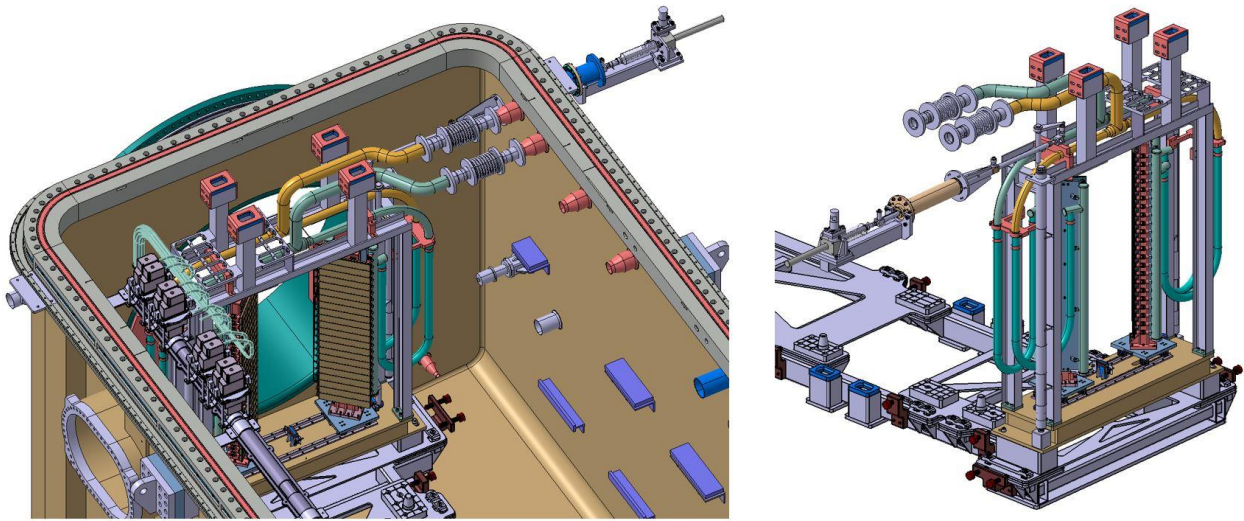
Calorimeter assembly inside the vessel with combined alignment mechanism
